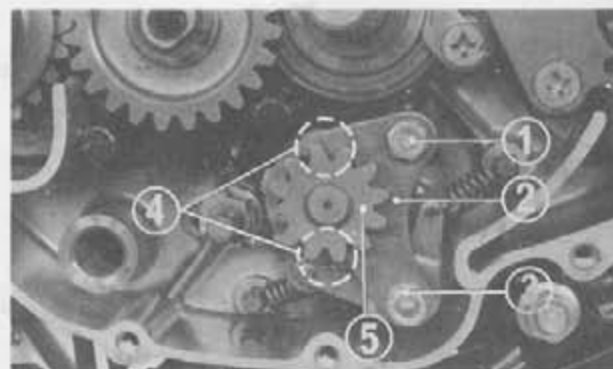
(1) 6 x 12 mm bolt (2) Plate guide (3) 6 mm nut (4) Ratchet pawl (5) Drum shifter
